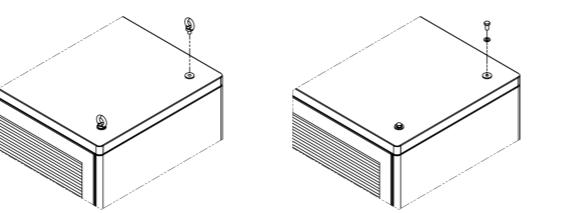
Detail of changing the lifting eye for screw, washer and O'ring
